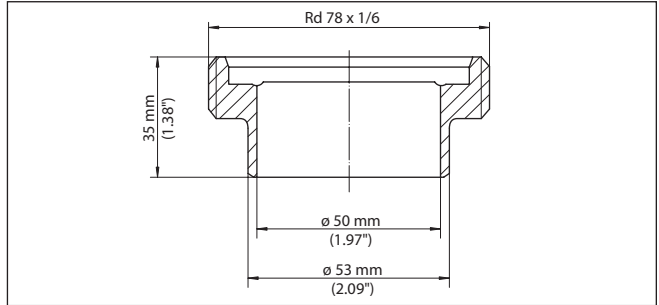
Dimensions of welded socket, slotted nut DN 50 (DIN 11864-1)
